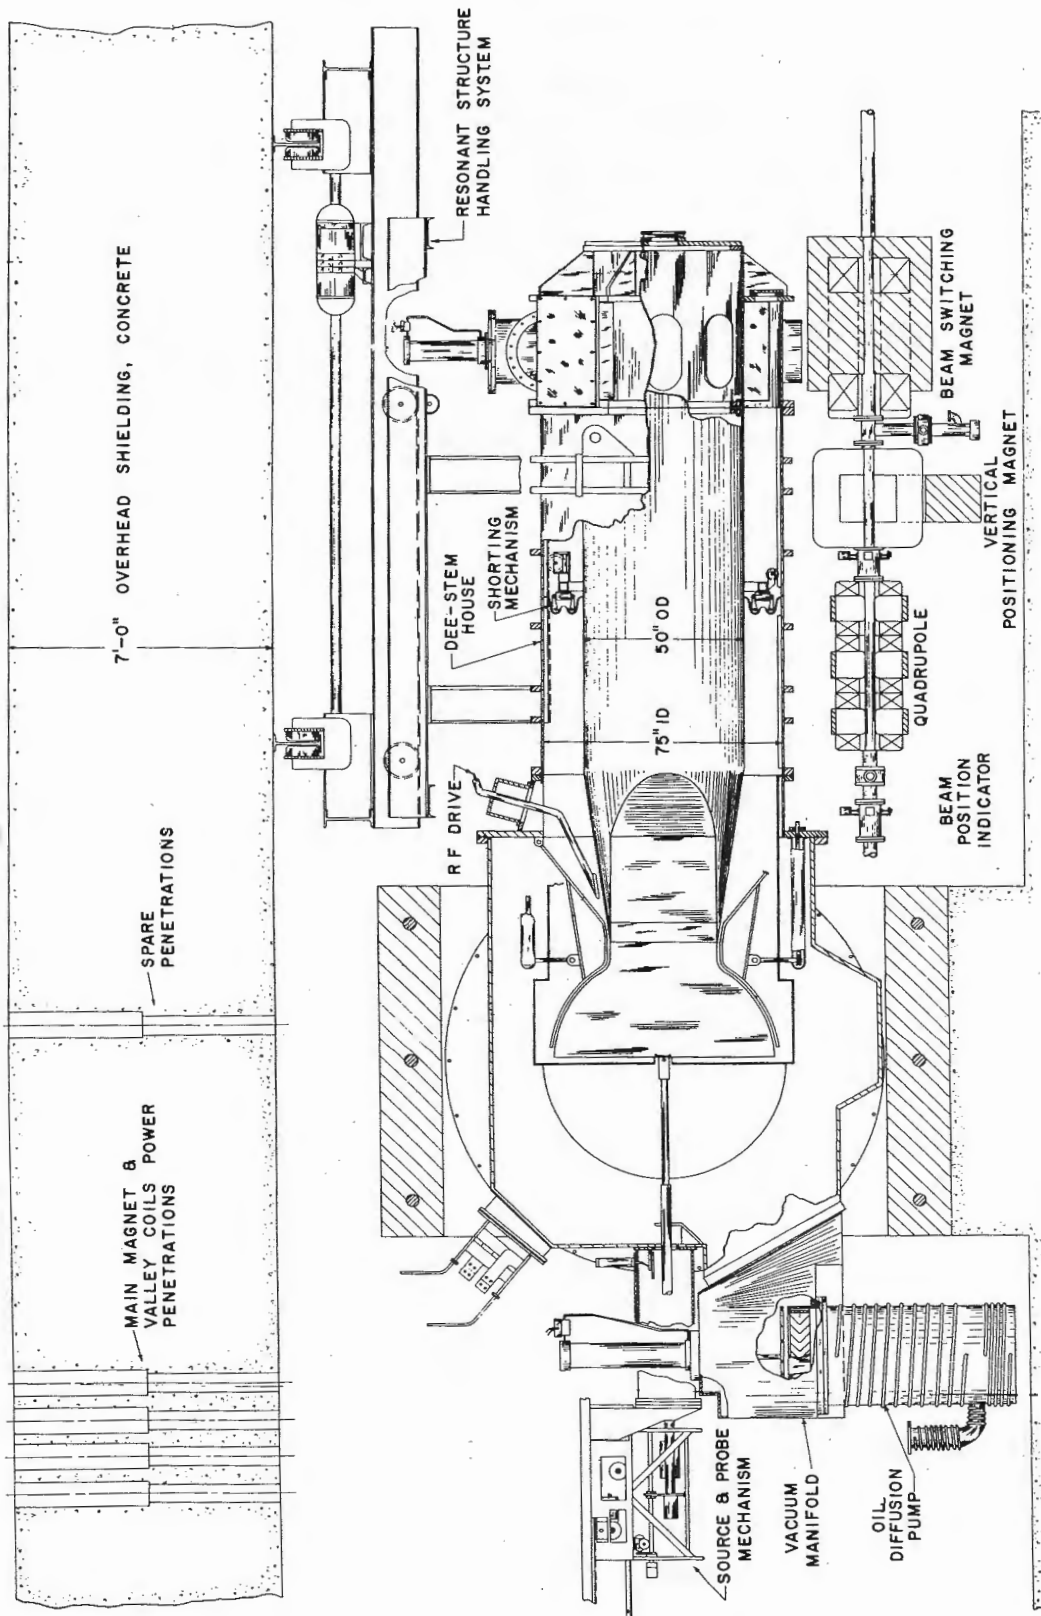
Vertical section through the ORIC, showing overhead shielding, method of supporting dee stem and house, and initial beam handling equipment
